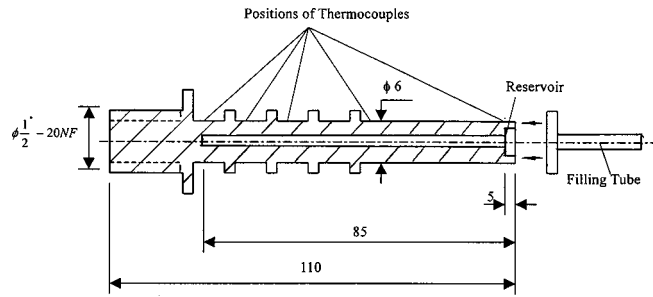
Schematic of radially rotating miniature heat pipes ($d = 1.5$ and 2 mm)
